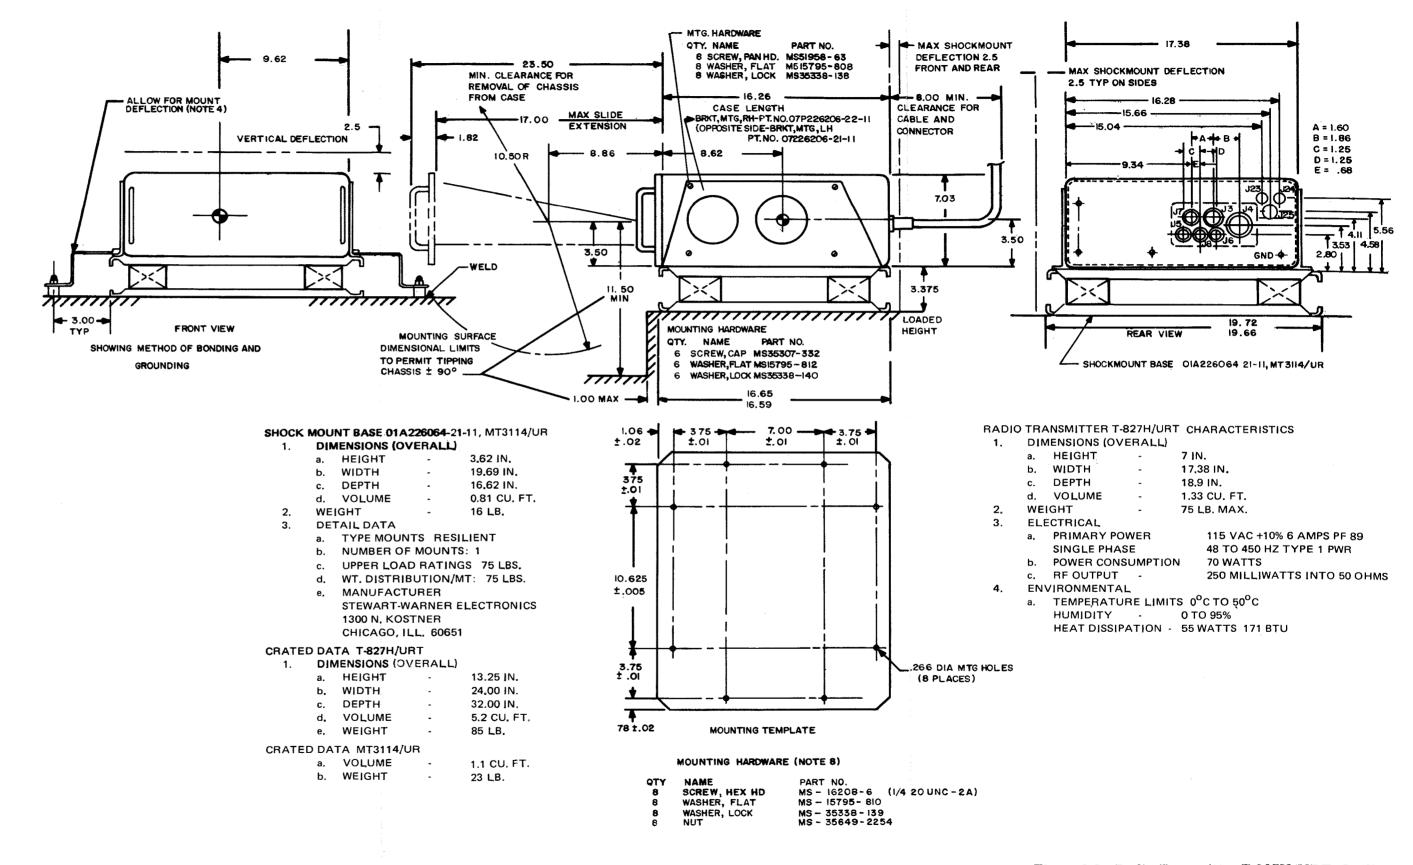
Radio Transmitter T-827H/URT, Outline and Mounting Dimensions (Sheet 1 of 2)
